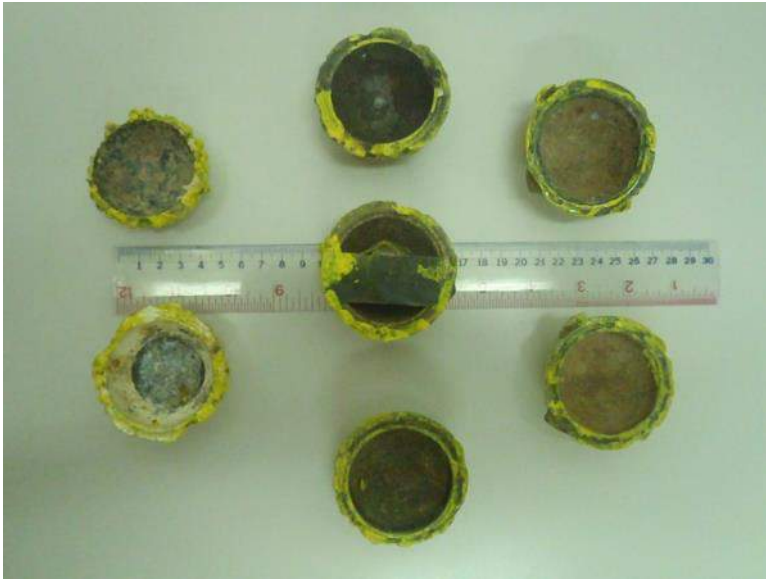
Half BLU 26 Inert Test Pieces - Inside View
